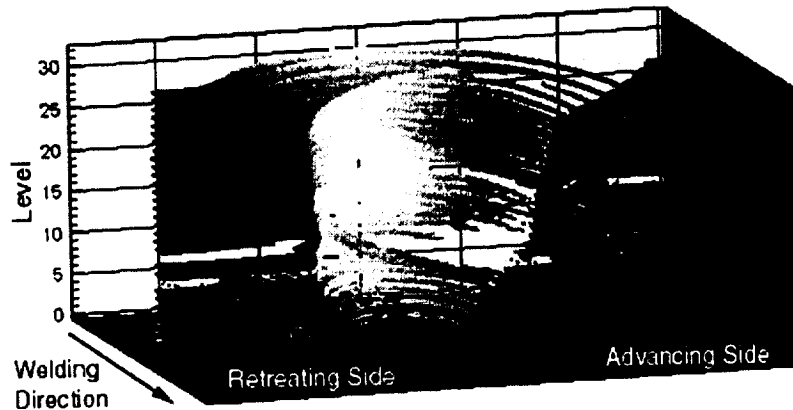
Front view of the 3-D plot of the deformed markers in Weld 38.
